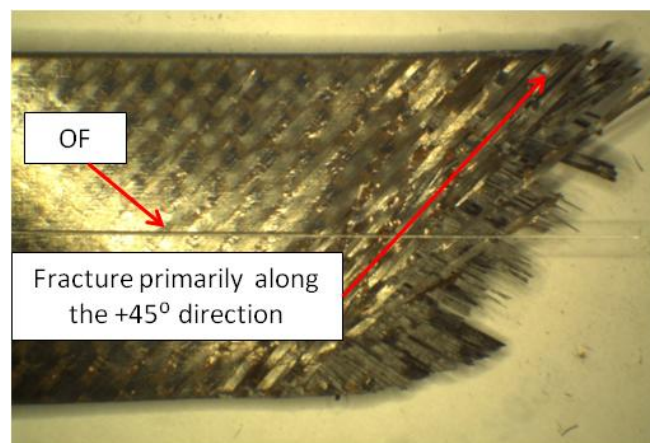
Fracture surface of a specimen that was statically loaded to failure at RT.
